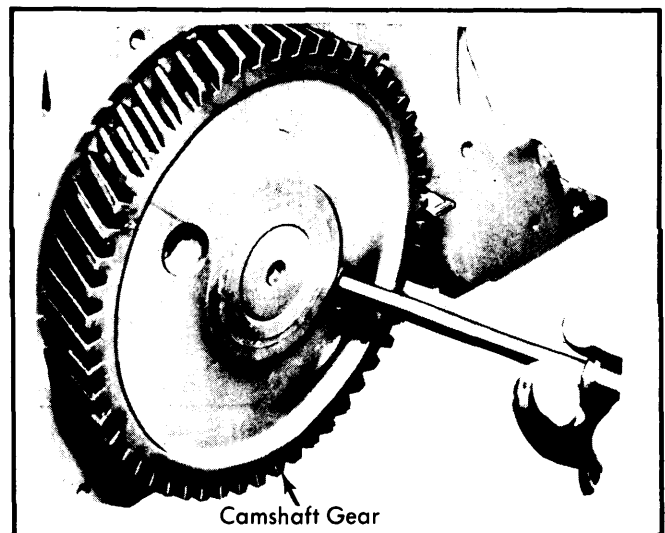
Removing Thrust Plate Screw with Screwdriver Inserted Through Timing Gear
